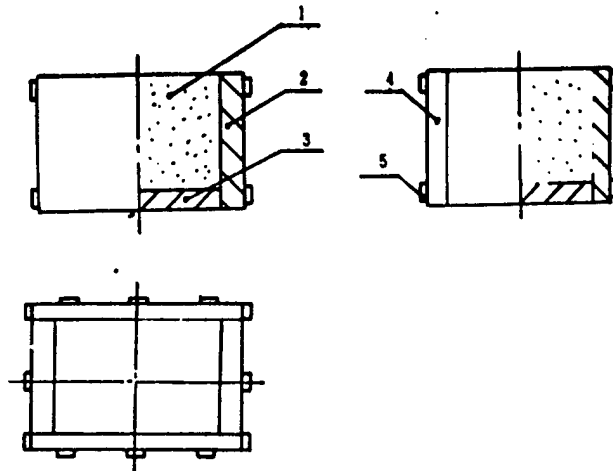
Silicon Rubber Core Mould Piece Forming Mould Composite Schematic
